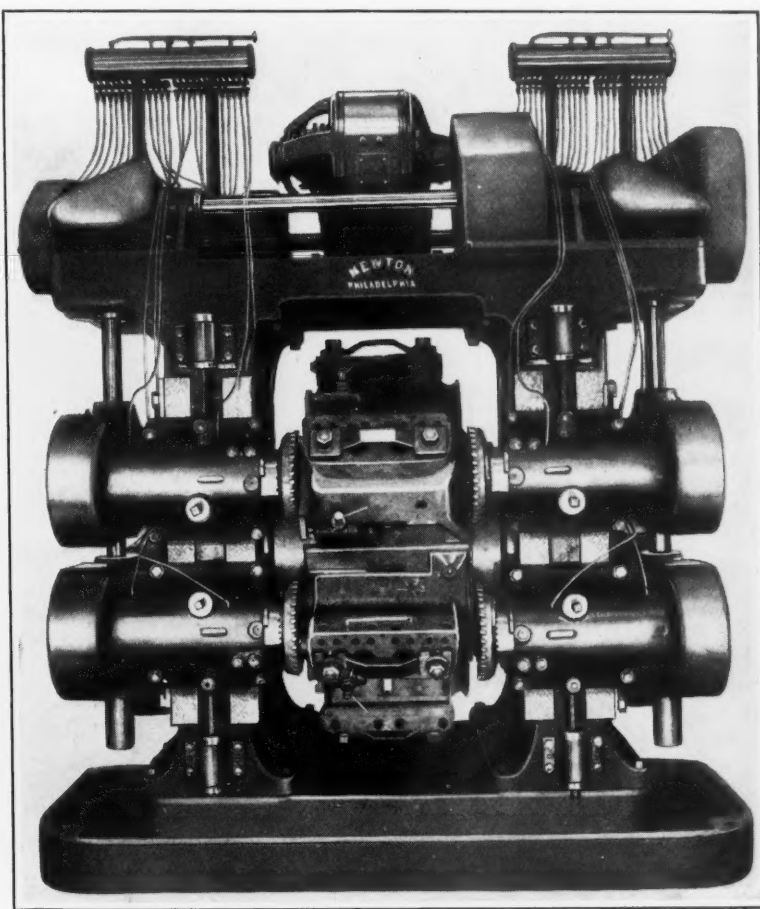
Drum Type Continuous Milling Machine built by the Newton Machine Tool Works, Inc.
